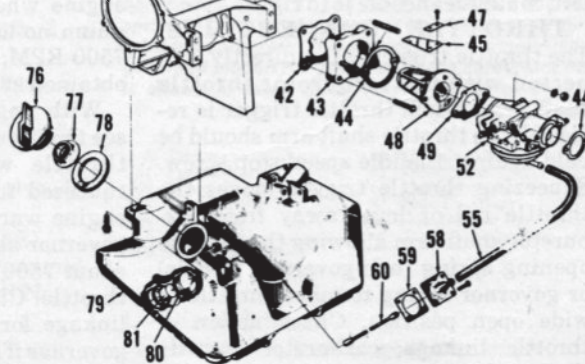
Exploded view showing fuel pick-up, carburetor and reed valve installation for models 995D and 995G. Throttle handle and linkage are shown in Fig. HL207. Note that a coil spring (56) is inserted in fuel line (55).
